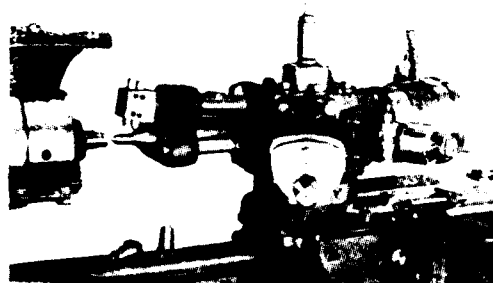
View of some of the special toolholders for producing Fusible Plugs.
